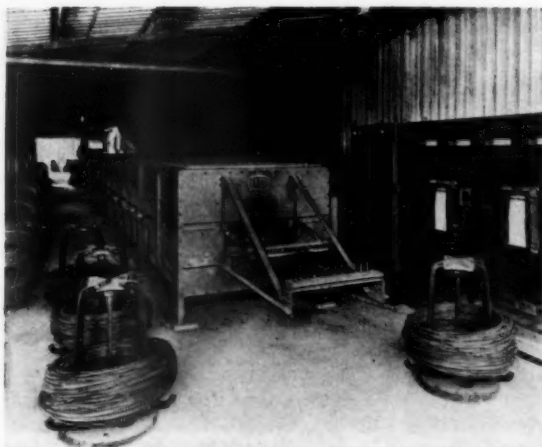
An 8-die concentric drawing machine; each drawing block is powered by a 25-hp motor
